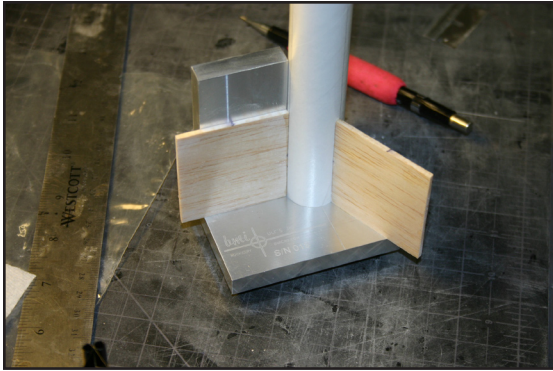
A fin jig was used to make sure the 0° fins were aligned straight on the rocket tube.
